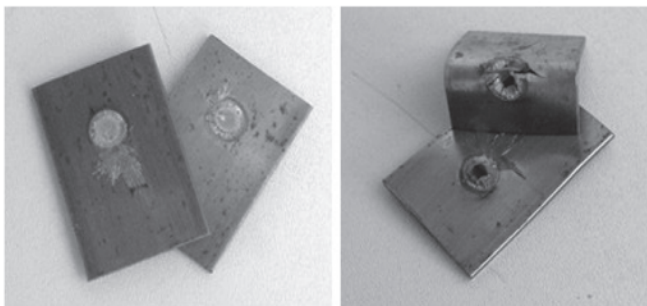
Brittle (Left) and Ductile (Right) Weld Failures Following Peel Testing
